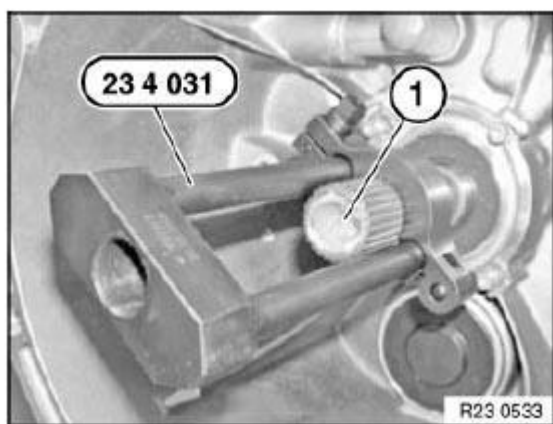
Identifying Pressed-In Grease On Drive Shaft
